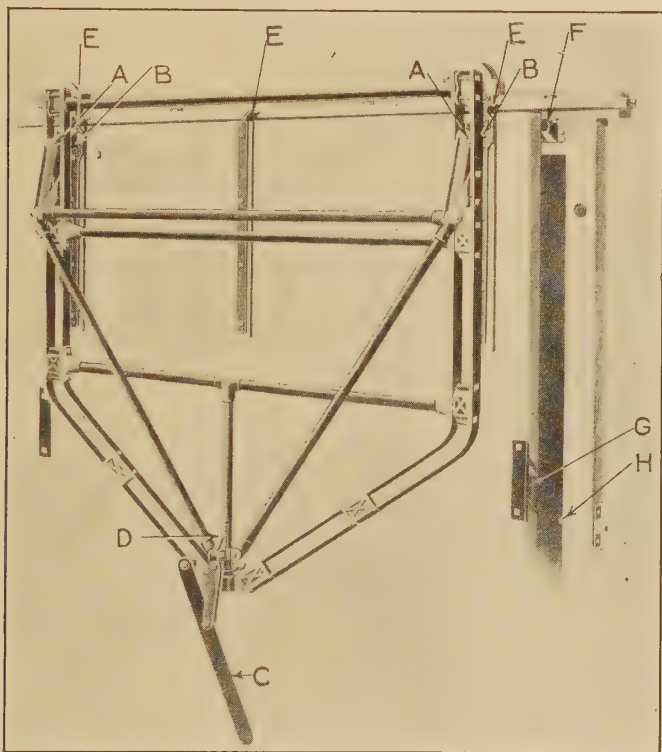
A dry-kiln door carrier. (Courtesy, Dry Kiln Door Carrier Co.)
